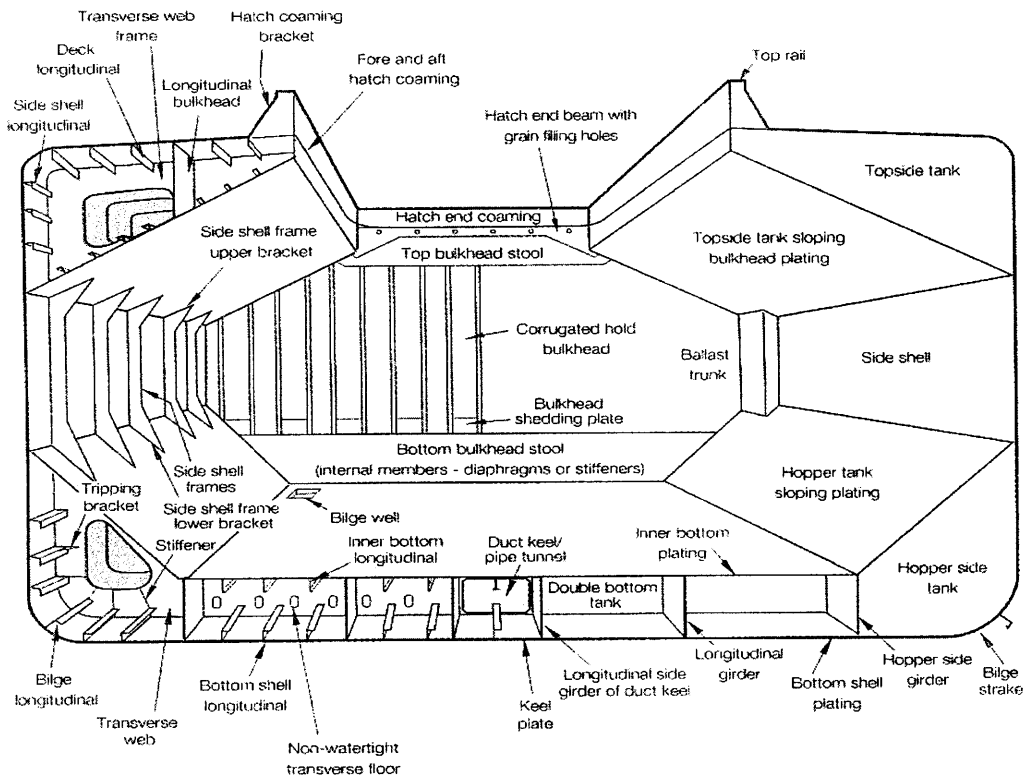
Structural Configuration of a Typical Capesize Bulk Carrier
